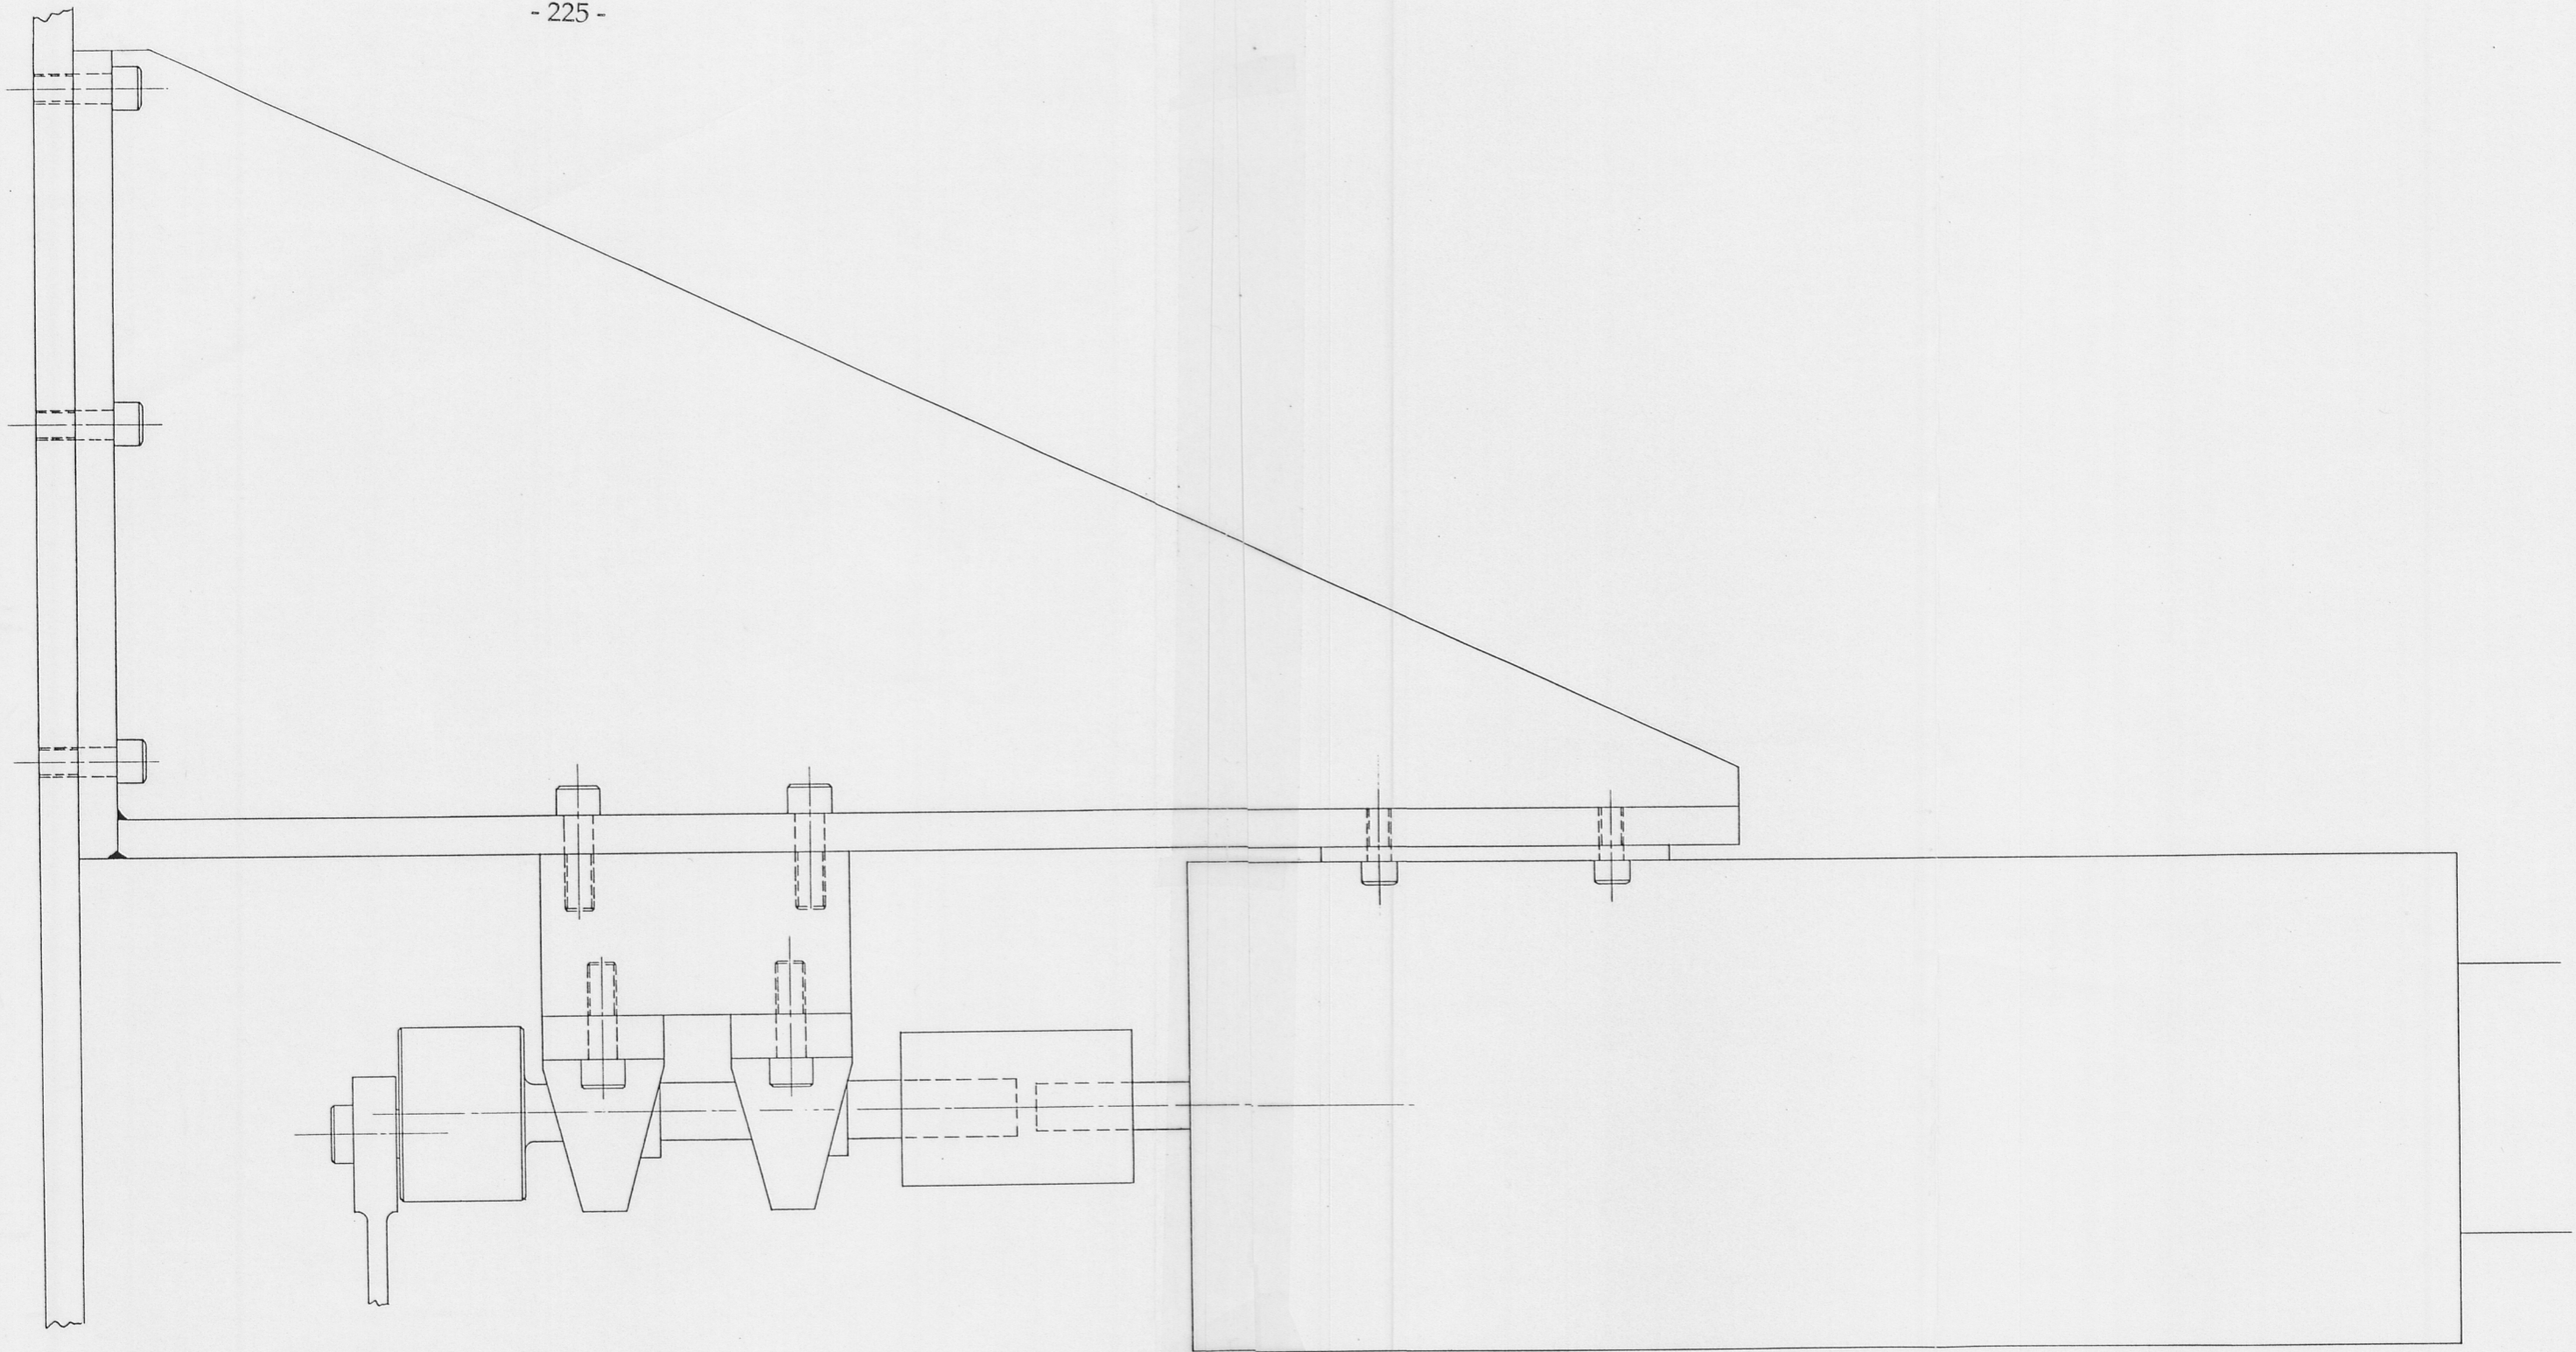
Drawing of Oscillation Motor Mount and Coupling
